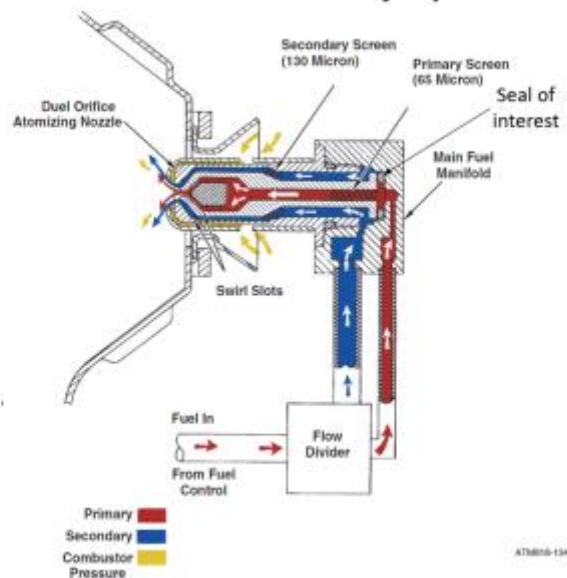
The fuel manifold and fuel nozzle assembly cross sections.
